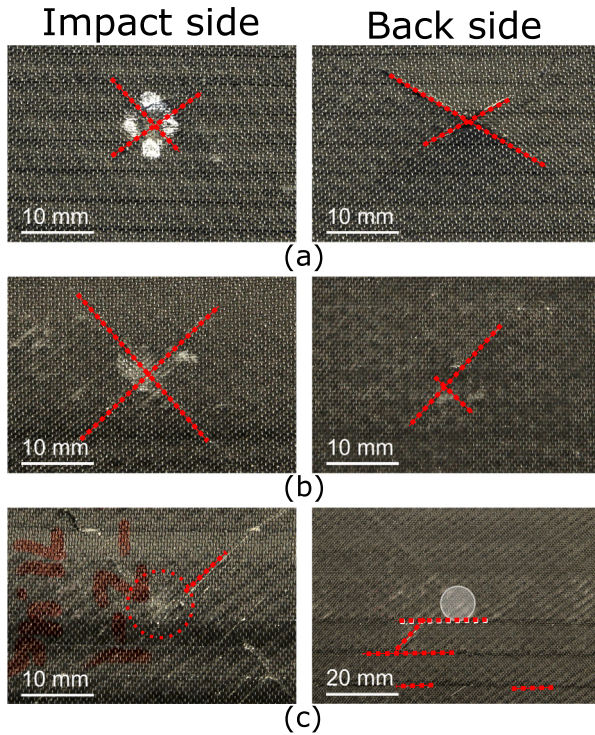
Impact and back sides views of (a) the Flat30, (b) the Taper45 and (c) the Taper45-600 specimens tested at 33 J [21].
